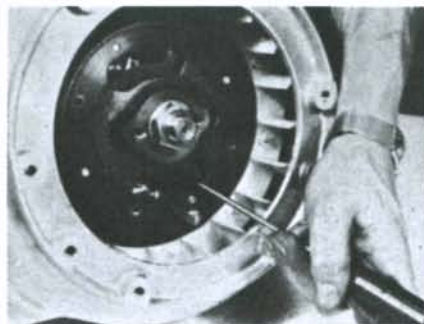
Breaker cam must be held in advanced position when checking timing.
